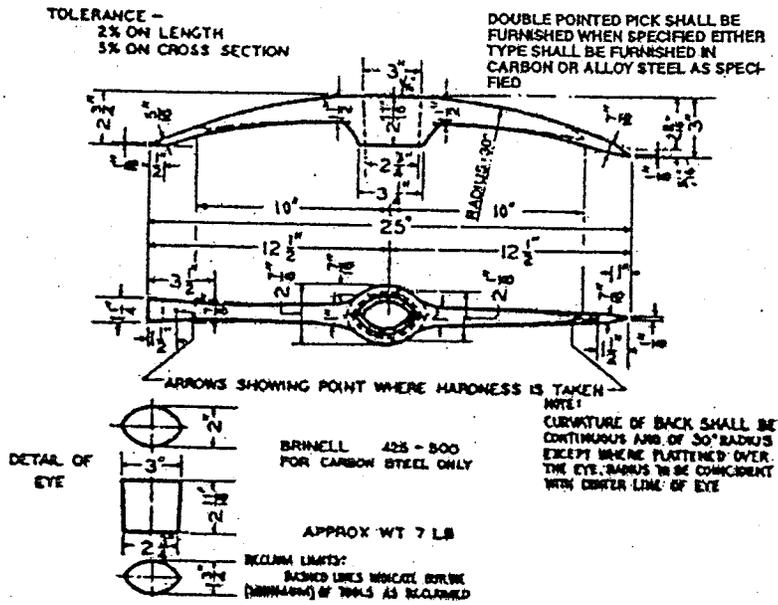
Plan 1-62 - AREMA Clay Pick
